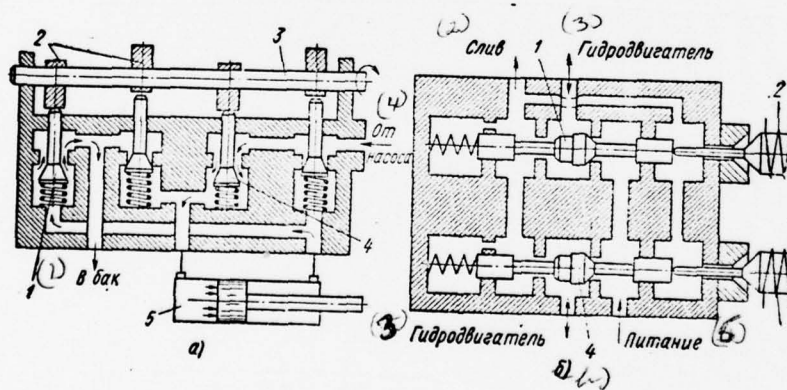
Valve distributor with cam (a) and electromagnetic (b) drive.
